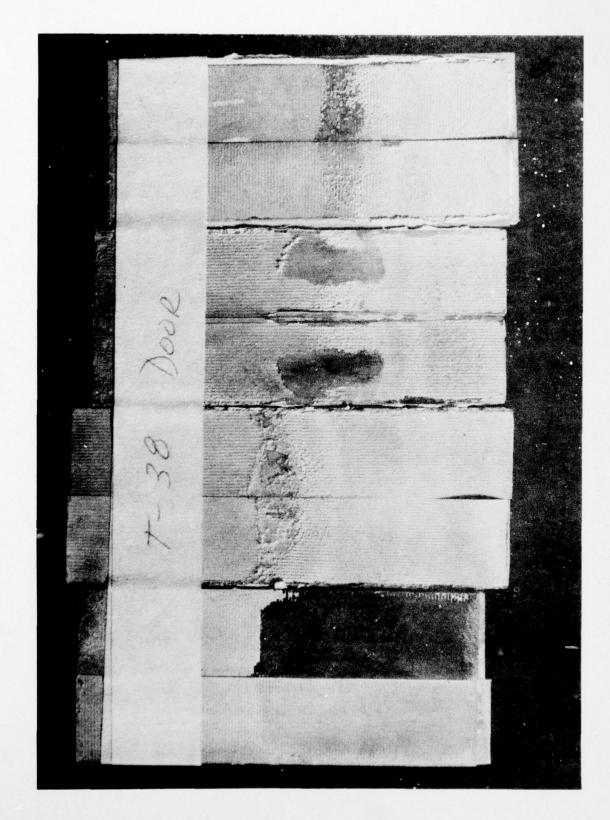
Failure Surface of Wedge Specimens From the T-38 Door Repair
